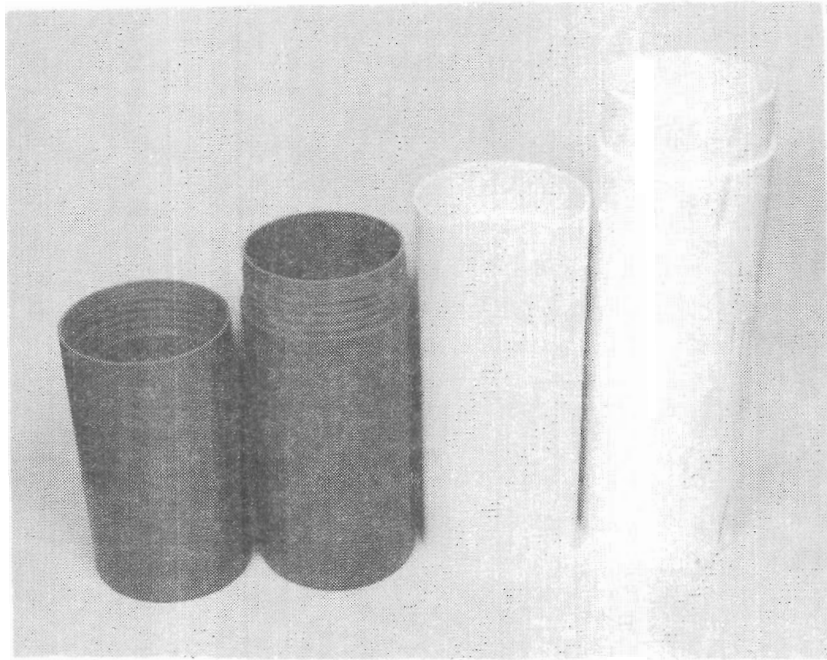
The two types of flush-fit joints tested were the solvent-welded, slip-fit joint and the threaded joint.
